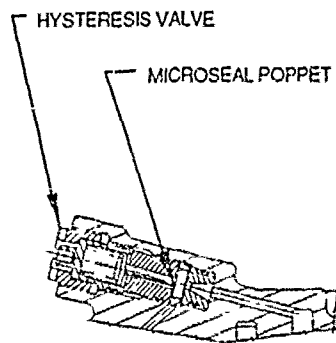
Parker - Switching Valve (6W-2P) Detail Drawing
